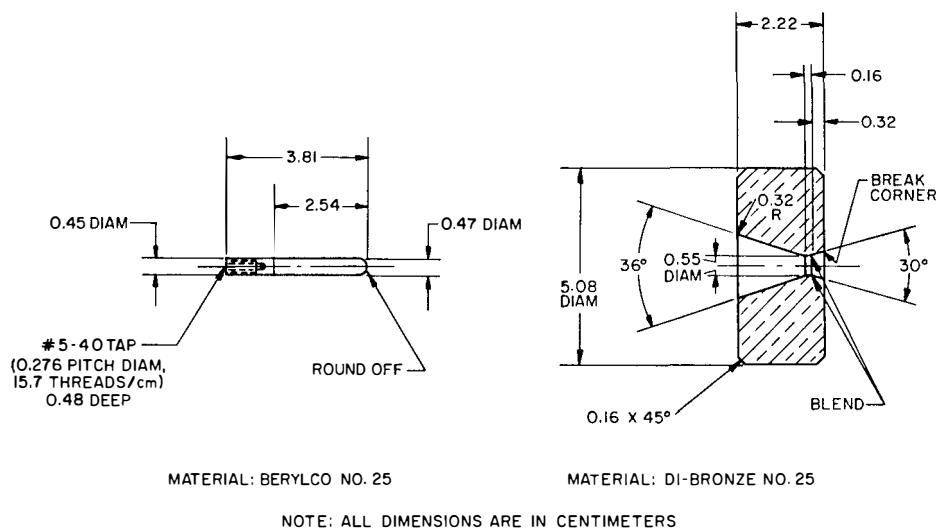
Typical Plug and Die Design for Plug Drawing of V-20w/oTi Tubing
